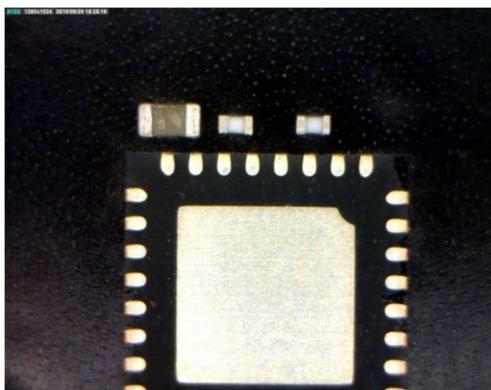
Photograph of active device in QFN package with three surface-mount passive components above.
